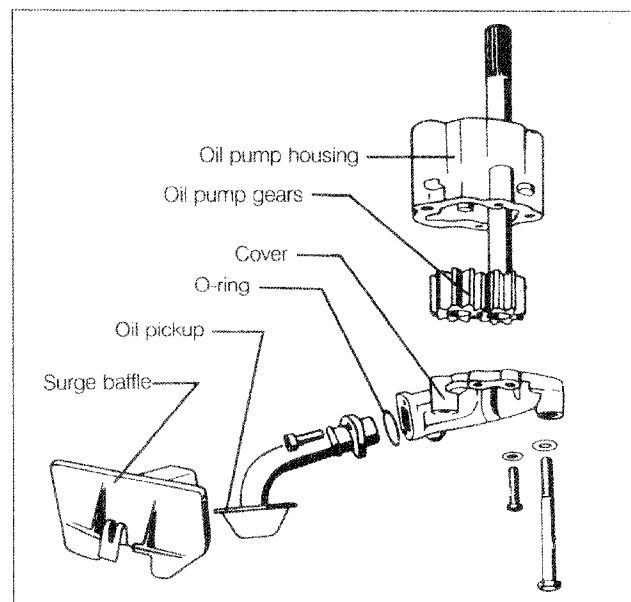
Exploded view of oil pump. Note long mounting bolts and short cover bolts
